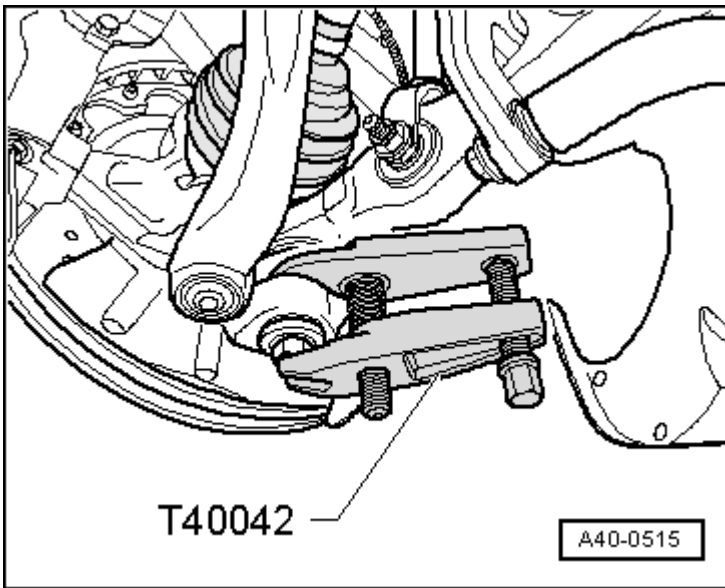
Using Ball Joint Puller T40042 Press Control Arm Ball Joint Off From Tapered Seat
